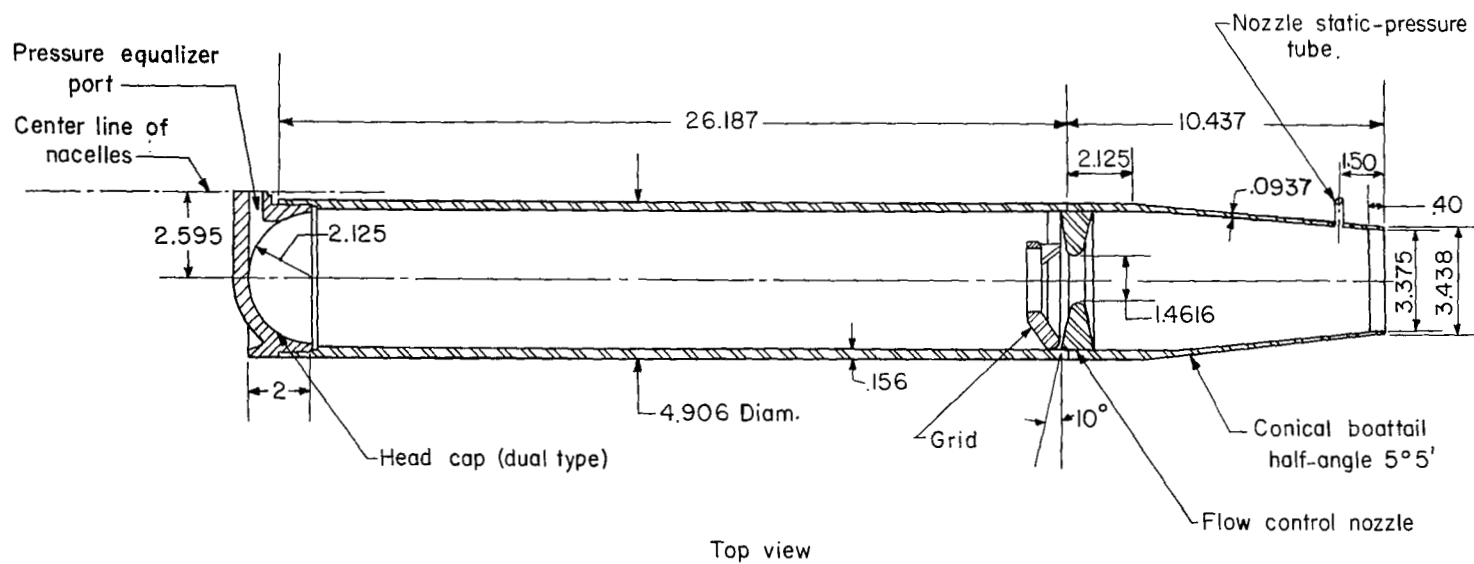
Drawing of turbojet simulator. All dimensions are in inches.
